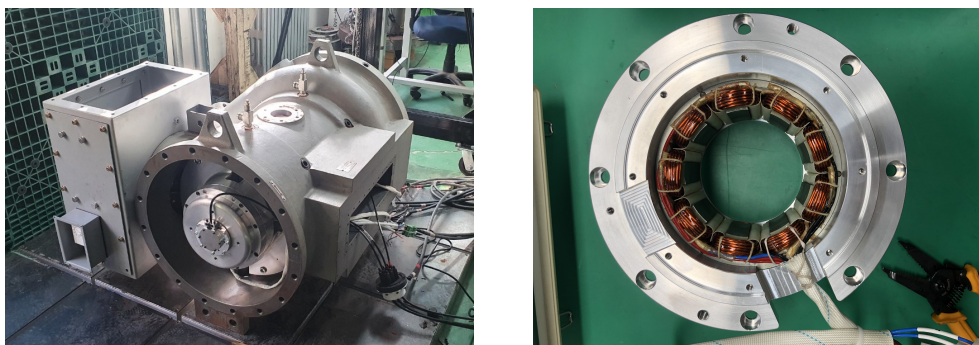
Prototype of chiller compressor and 9-pole radial AMB
